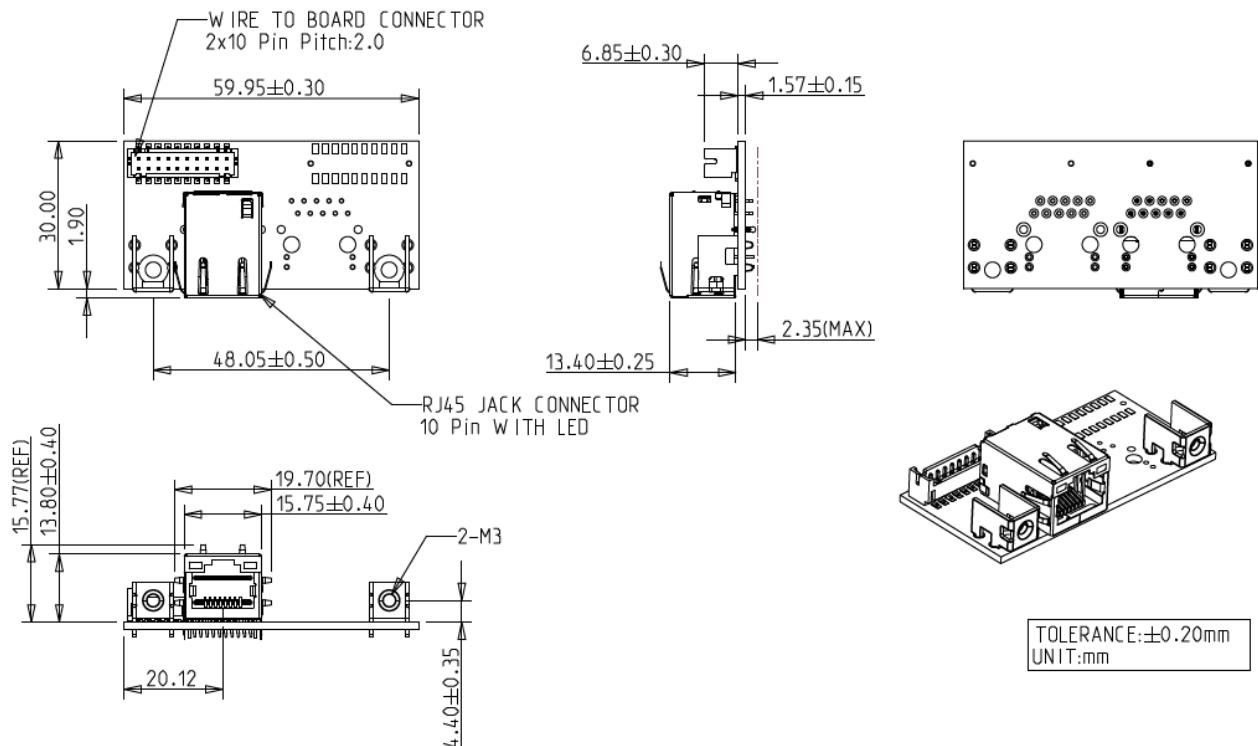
Mounting Hole Daughter Board Drawing (EGLP-G1S1-C1/W1)
